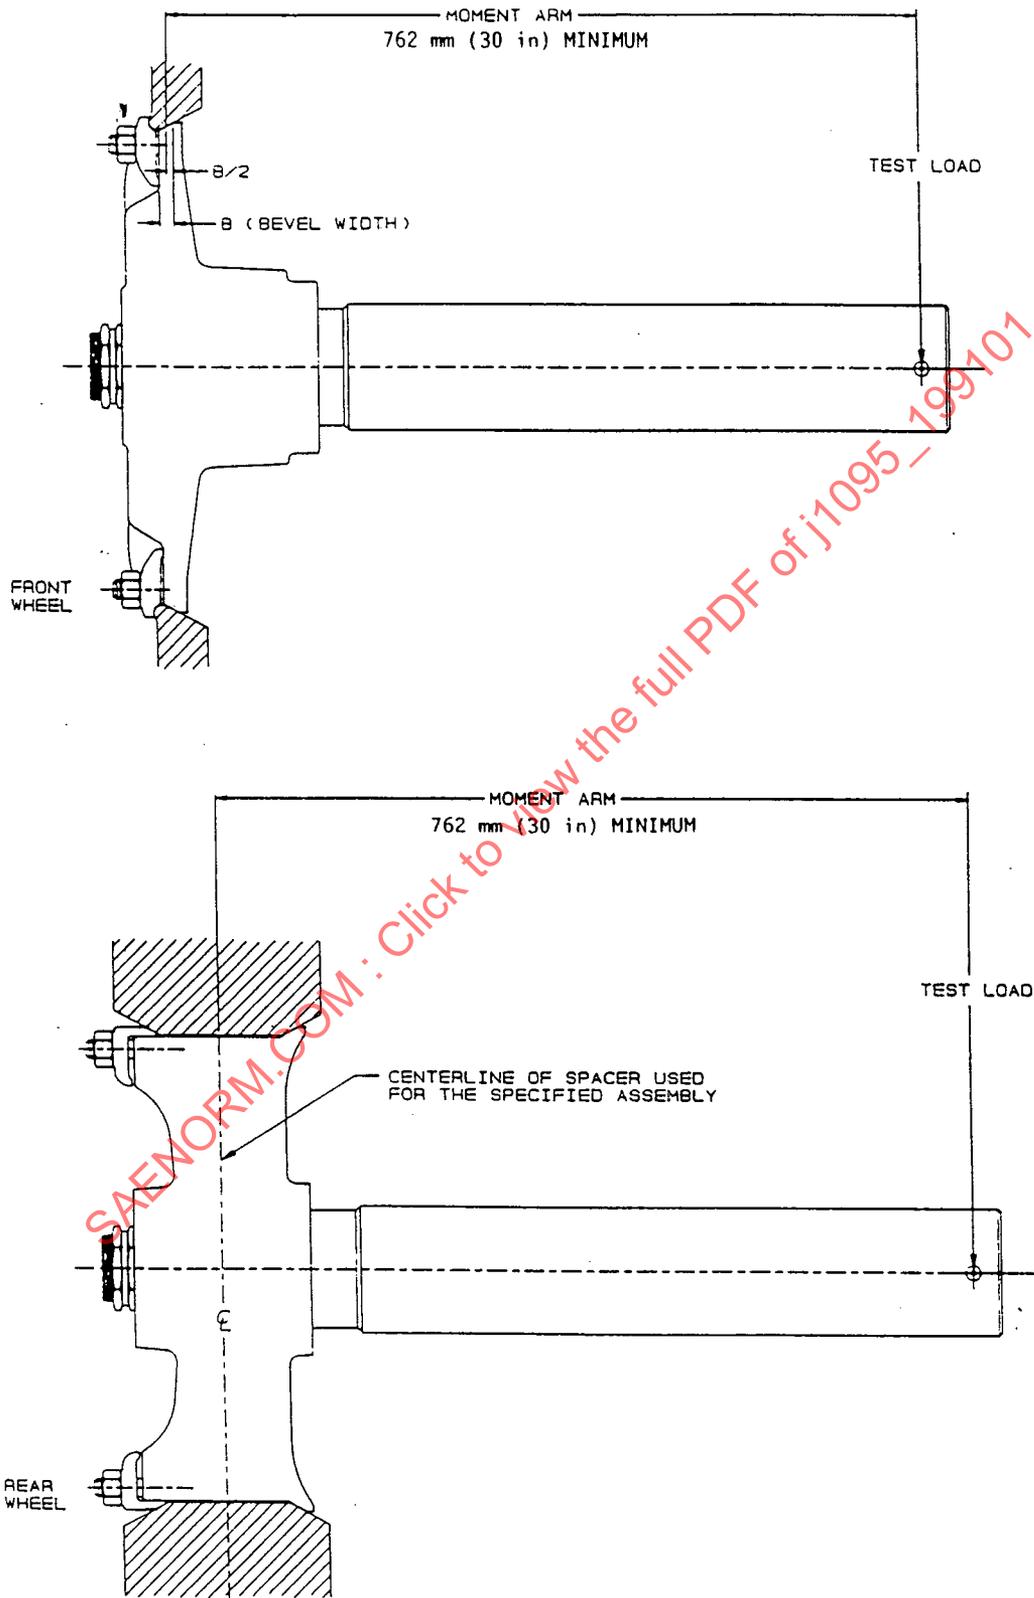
90 DEGREE CORNERING FATIGUE TEST (TYPICAL SET-UP)
